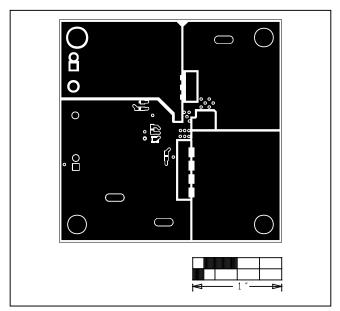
MAXM17545 EV Kit PCB Layout—Solder-Side
